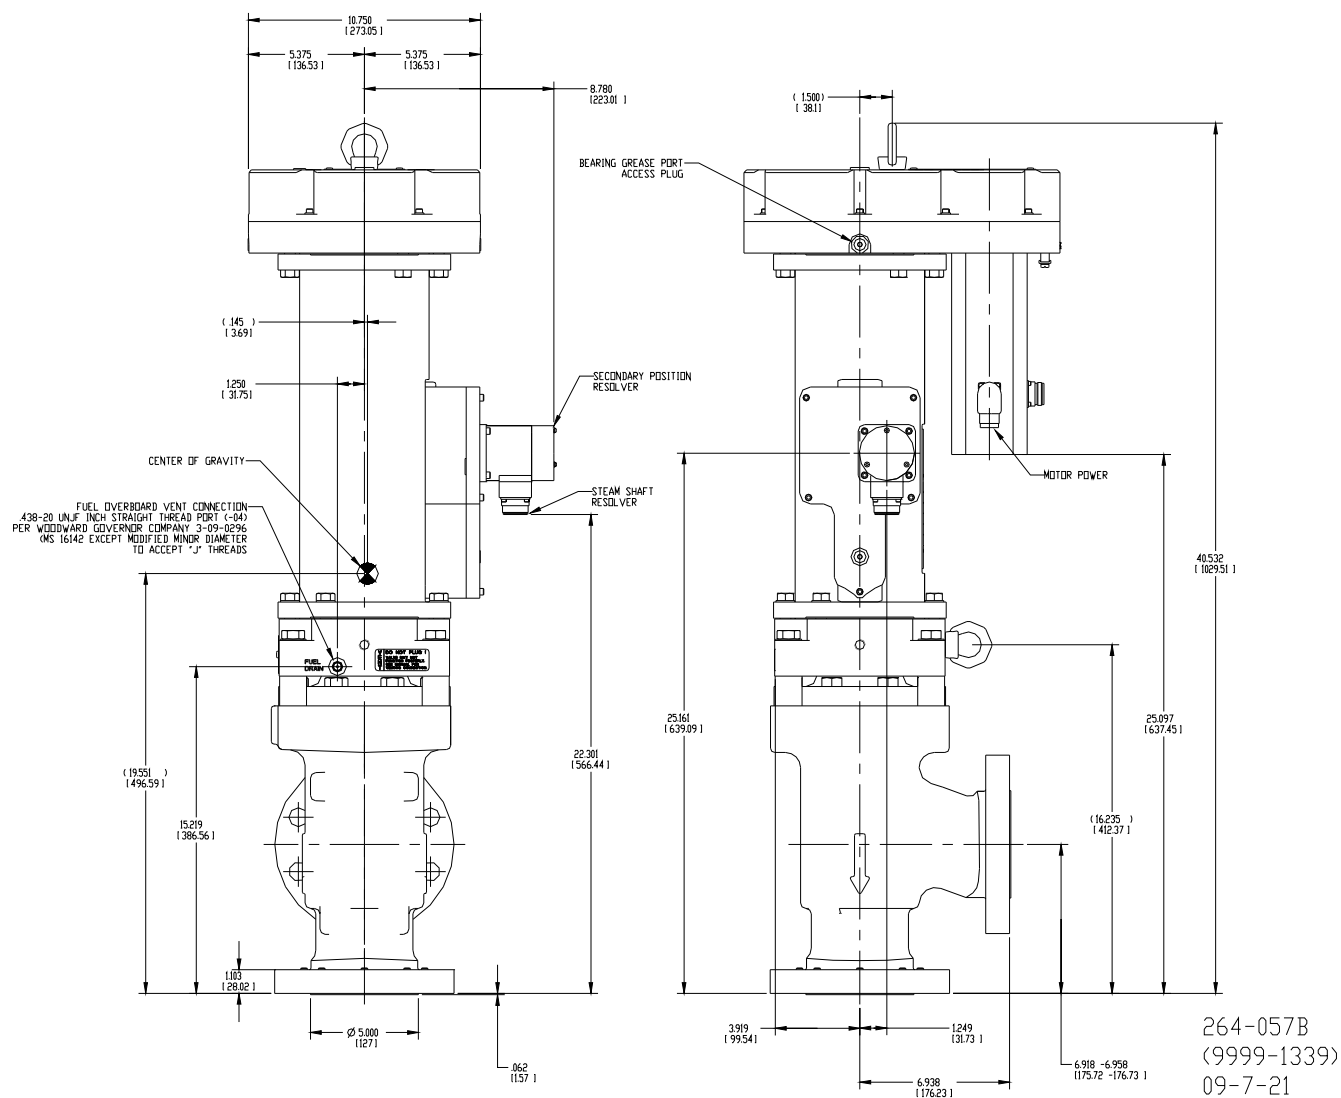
Outline Drawing 3" LESV (Right View)
